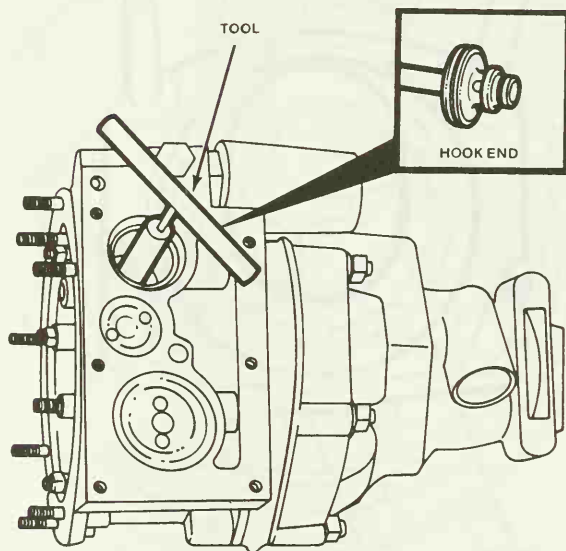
Removing the relief valve body and sleeve. (American Motors Corporation)
